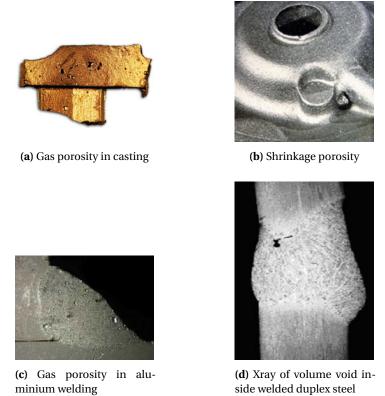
Examples of porosity in casting and welding
